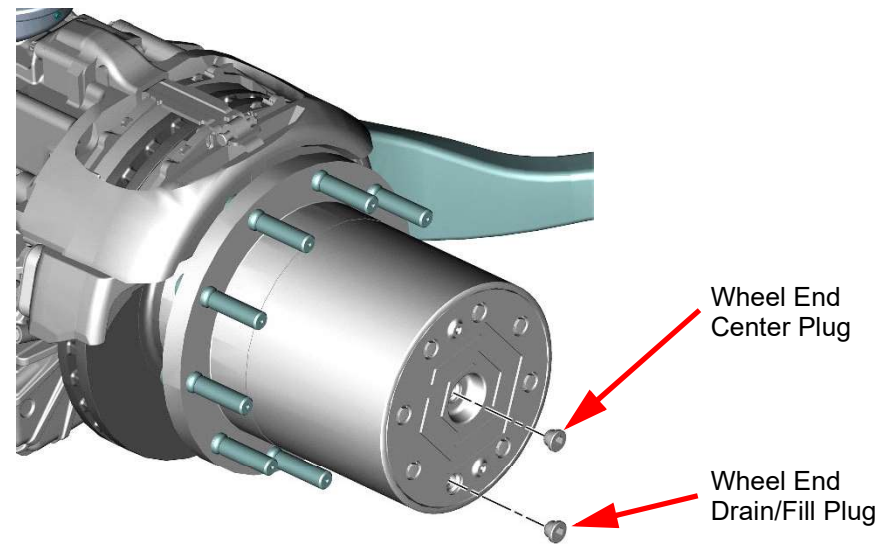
Removing Wheel End Drain/Fill Plug and Center Plug
